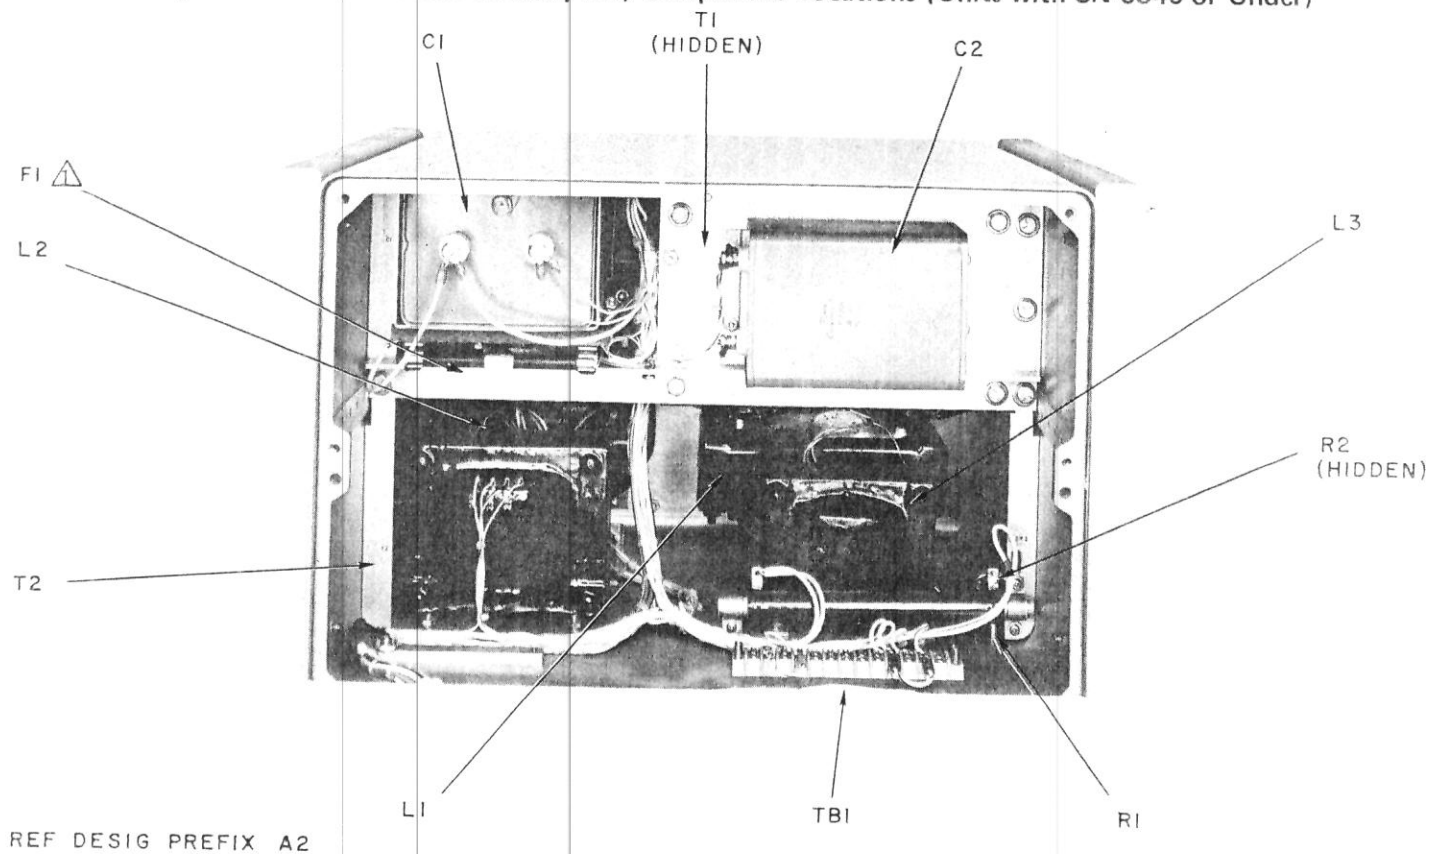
Case Assembly A2, Component Locations (Units with SN-0340 or Under)
